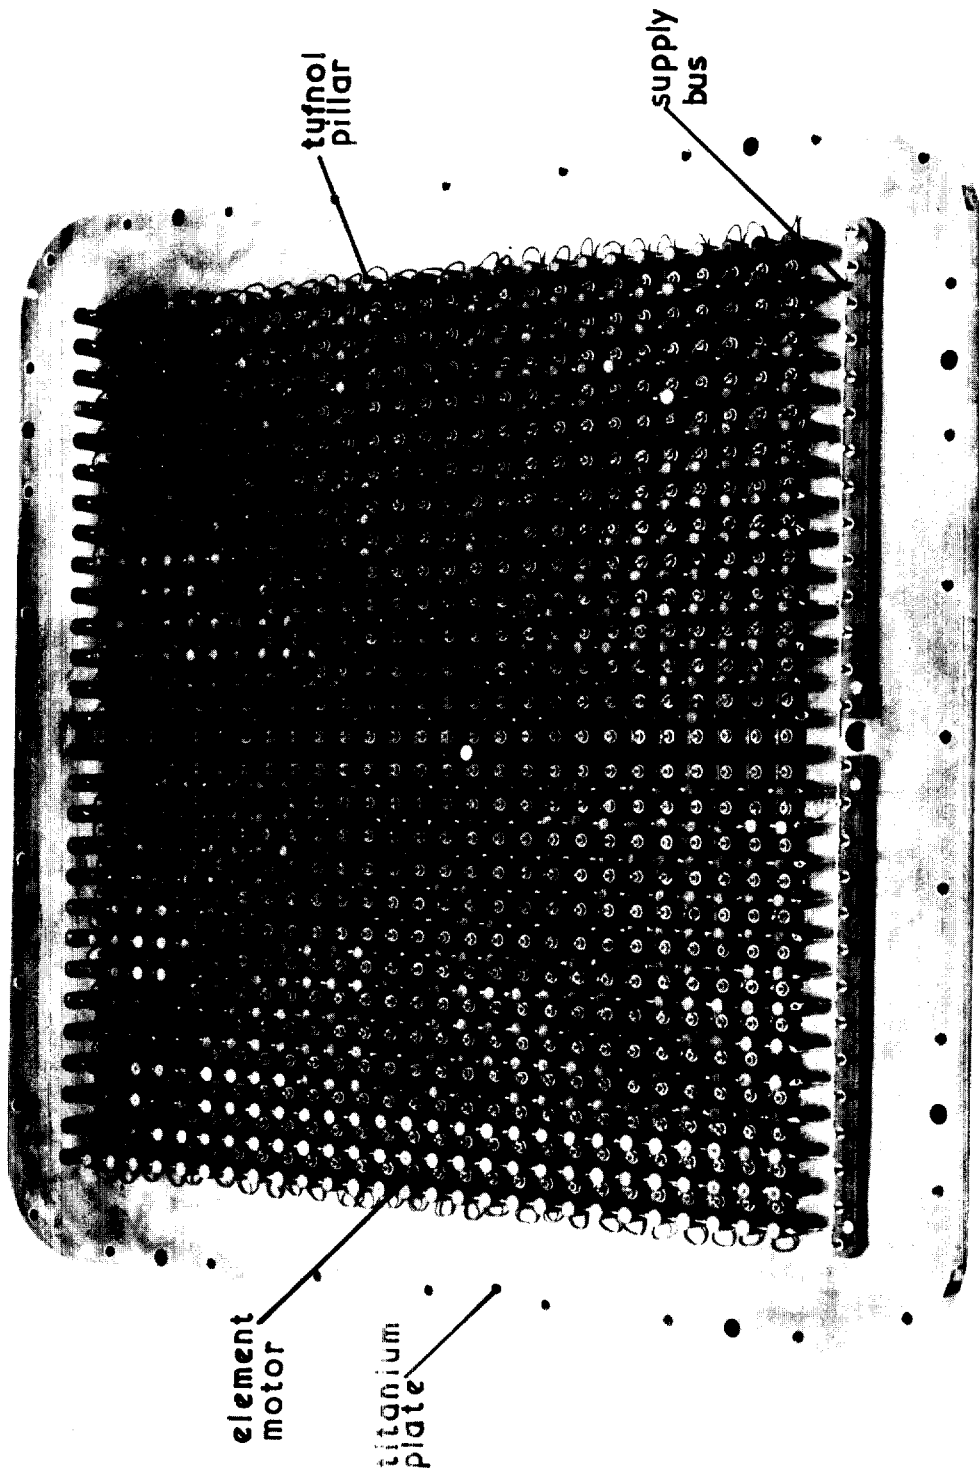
ASSEMBLED TRANSDUCER REAR VIEW
